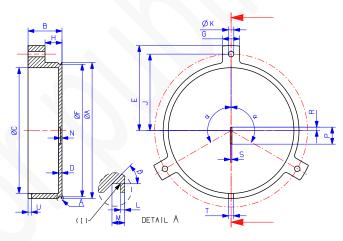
TUTF-PHJ85d-*x*—heat sink
